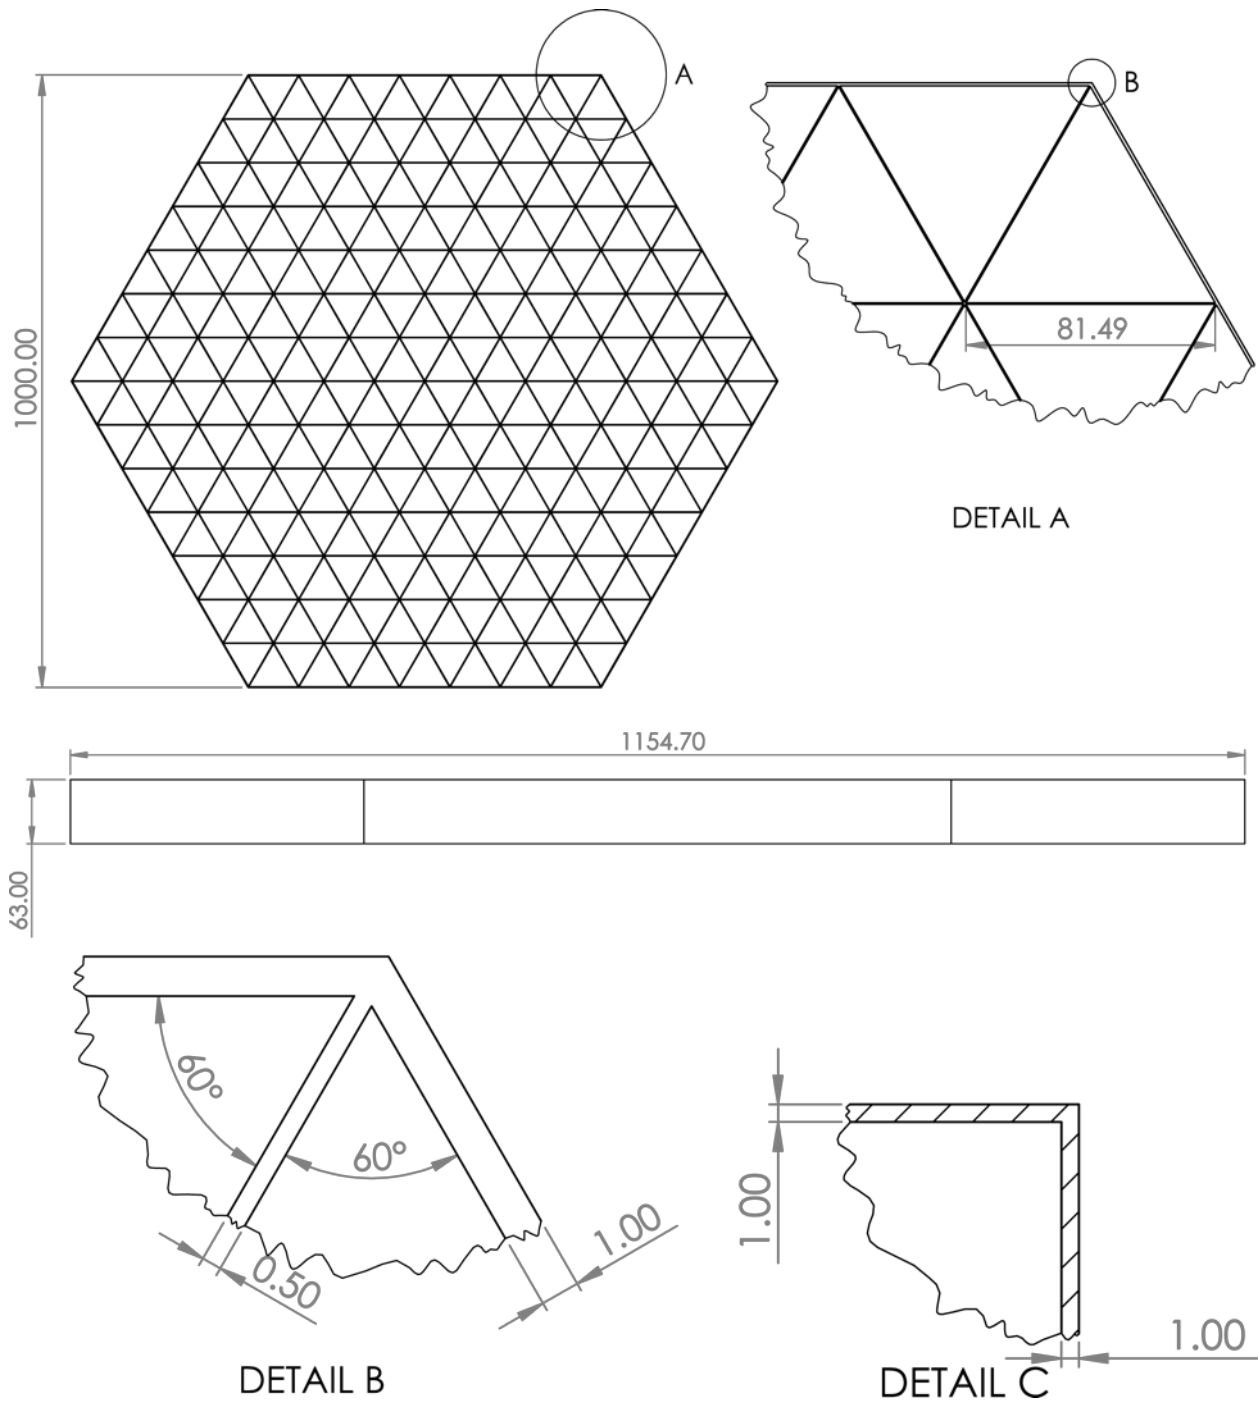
1 m Flat-to-Flat mirror CAD model showing bottom view with flat-to-flat dimensions and 'A' section location (top left), 'A' section showing triangle side length and 'B' section location (top right), mirror side view showing mirror corner-to-corner dimension and thickness with 'C' section being top right corner of this view (center), 'B' section view showing triangle corner angles, rib thickness, and outer edge thickness (bottom left), 'C' section showing assumed top surface thickness (bottom right).
